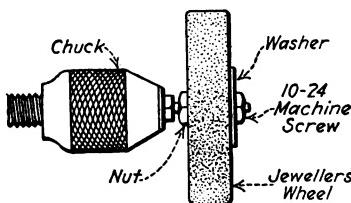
Mounting a very small grinding wheel in a small drill chuck
